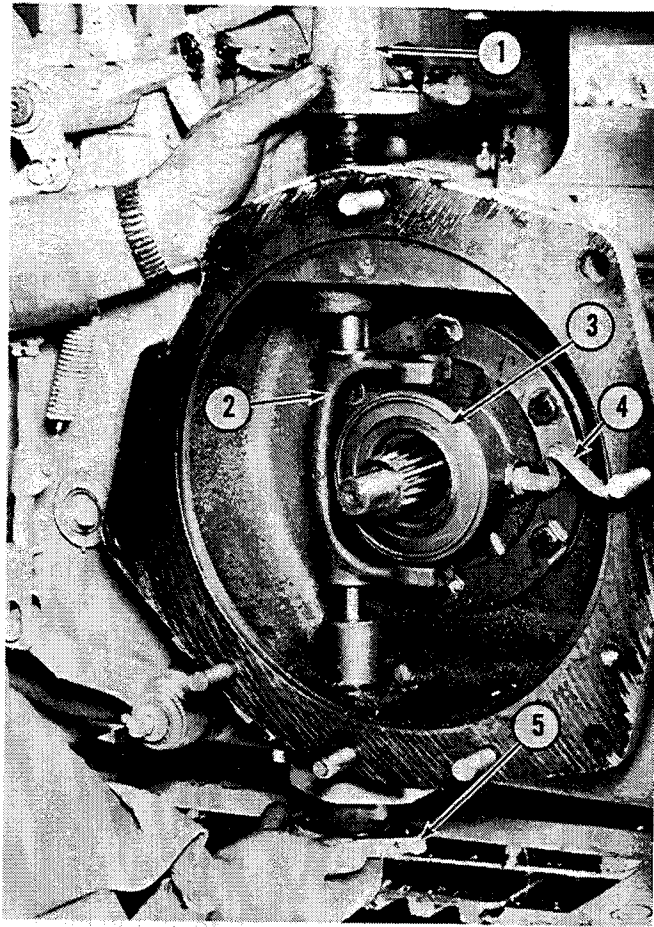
REMOVING CLUTCH RELEASE BEARING
